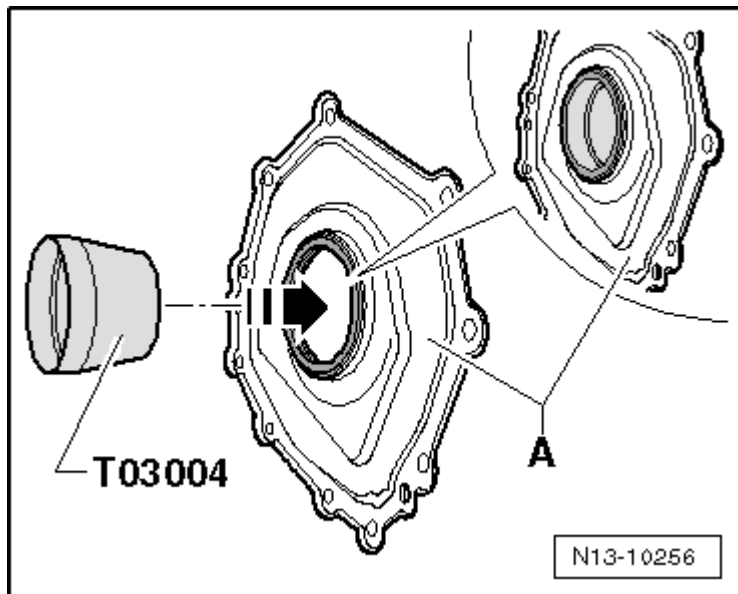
Widening Sealing Lip Of New Sealing Flange Using Assembly Sleeve T03004
